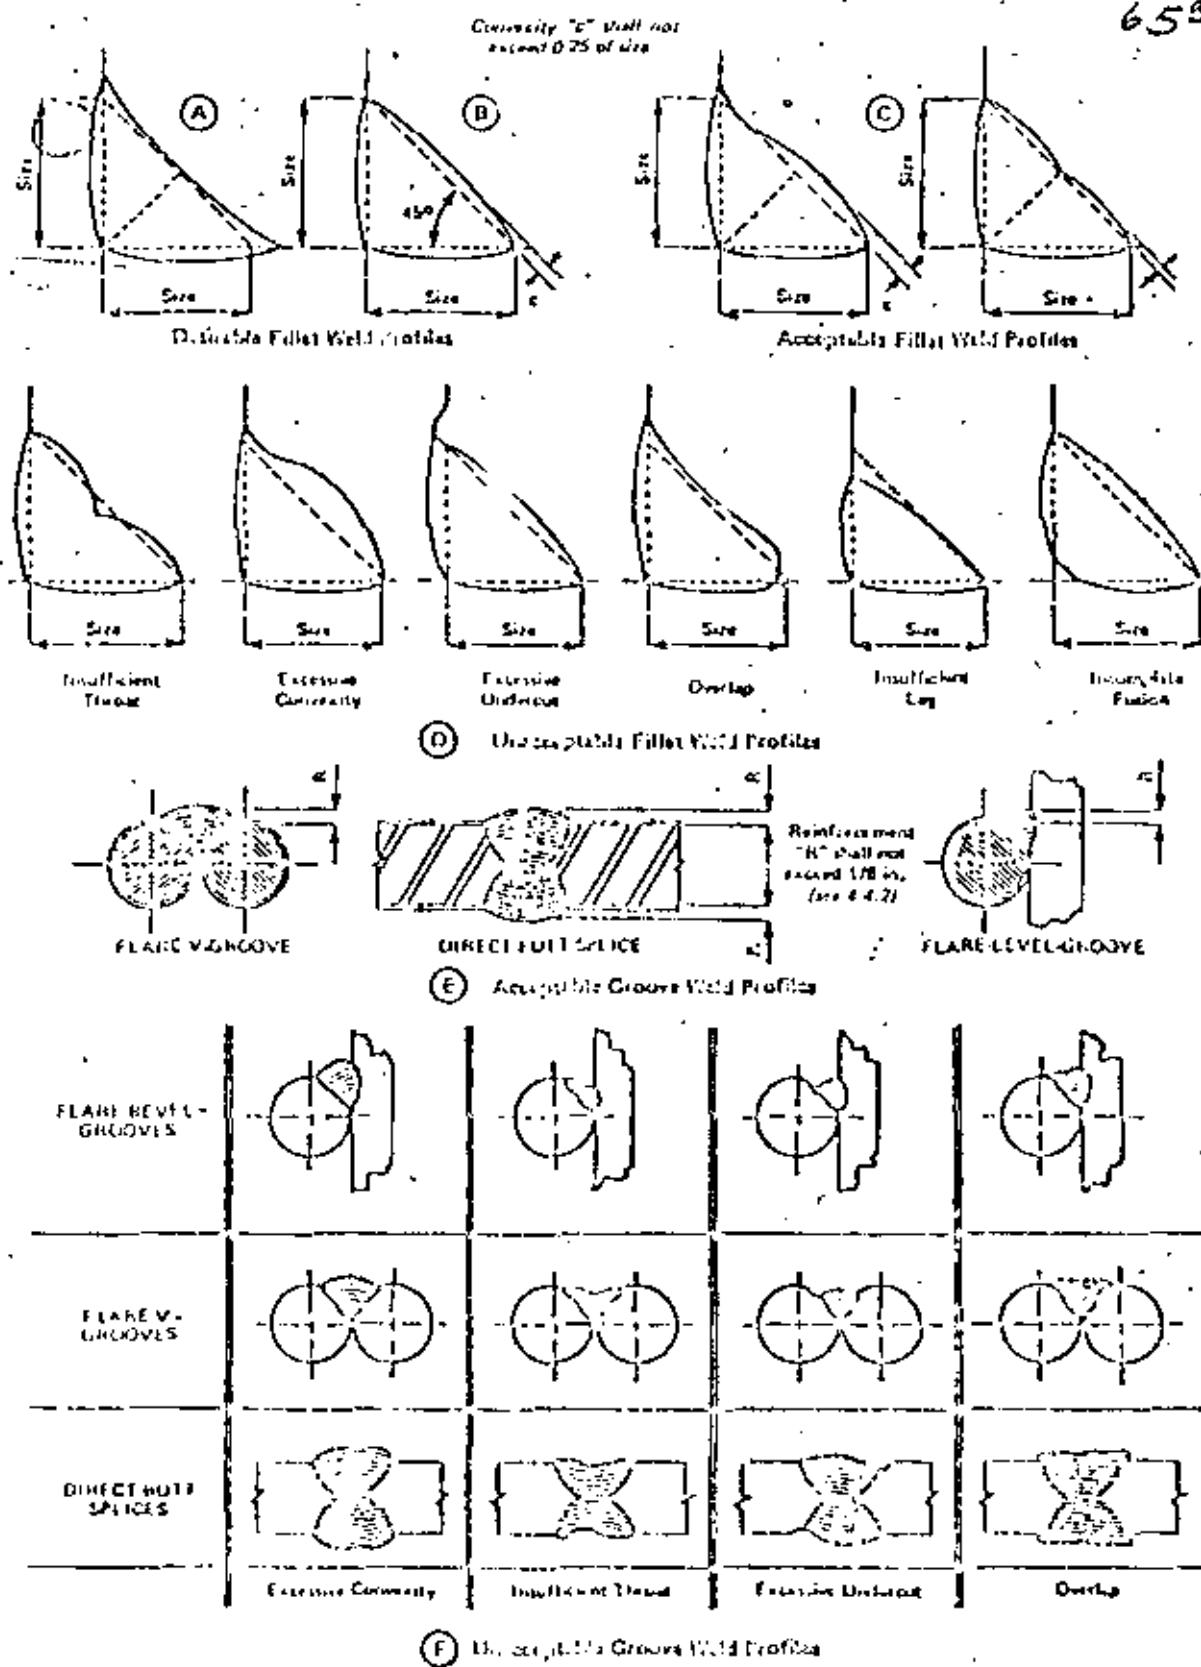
Acceptable and unacceptable weld profiles.
